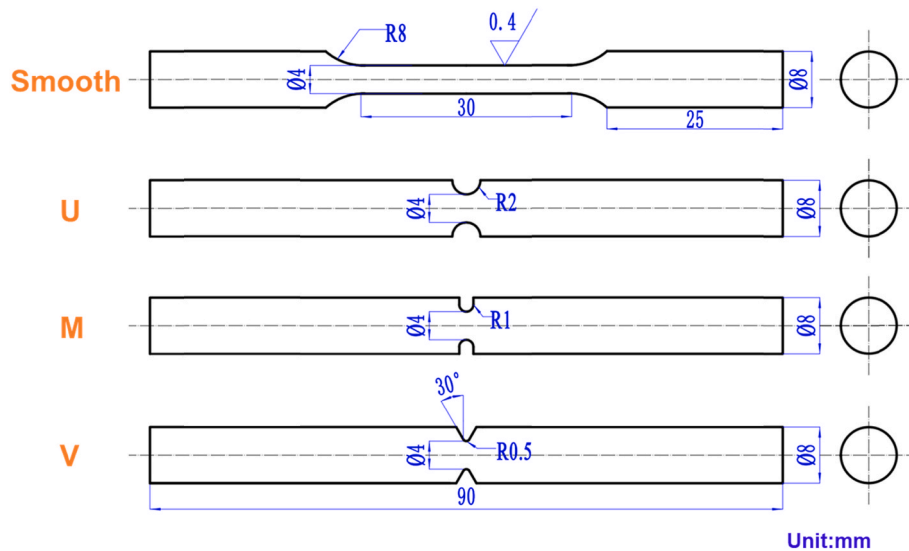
The dimensions of Smooth, U, M and V tensile specimens. The surface roughness after machining is 0.4.
